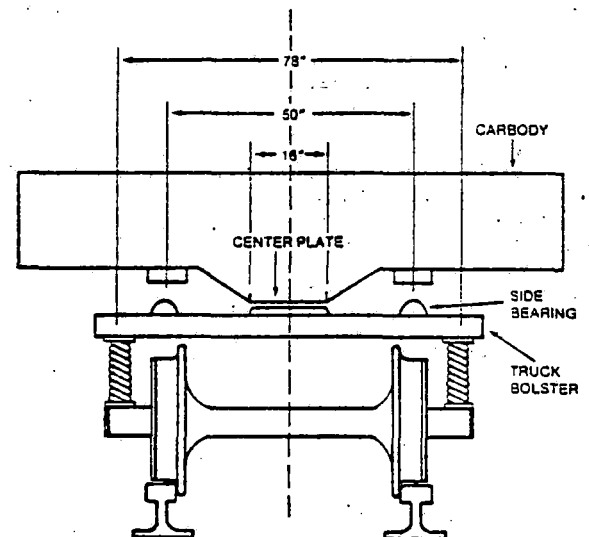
Sketch of freightcar end view showing center plate and side bearing
